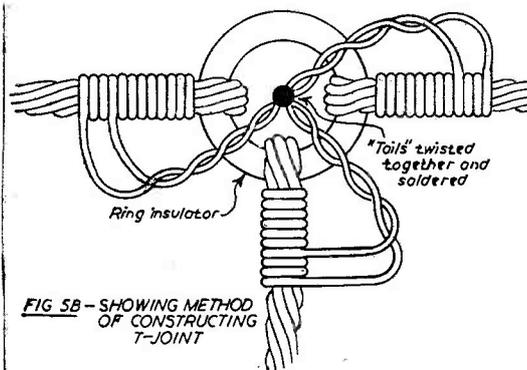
B—SHOWING METHOD OF CONSTRUCTING T-JOINT
